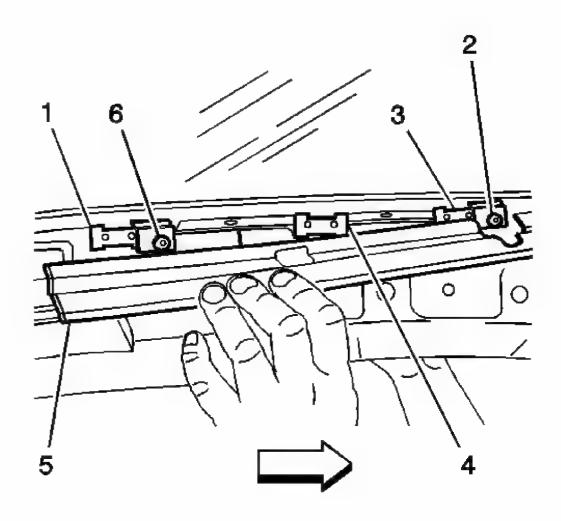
Identifying Sunroof Panel Side Opening Closeout Panel Cover Courtesy of GENERAL MOTORS CORP.
